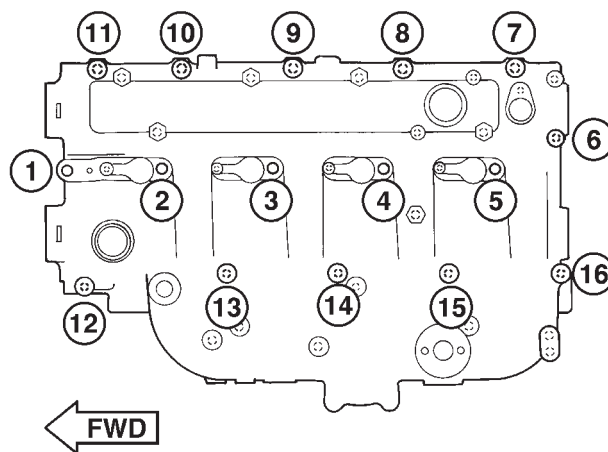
CYLINDER HEAD COVER/INTAKE MANIFOLD TIGHTENING SEQUENCE
